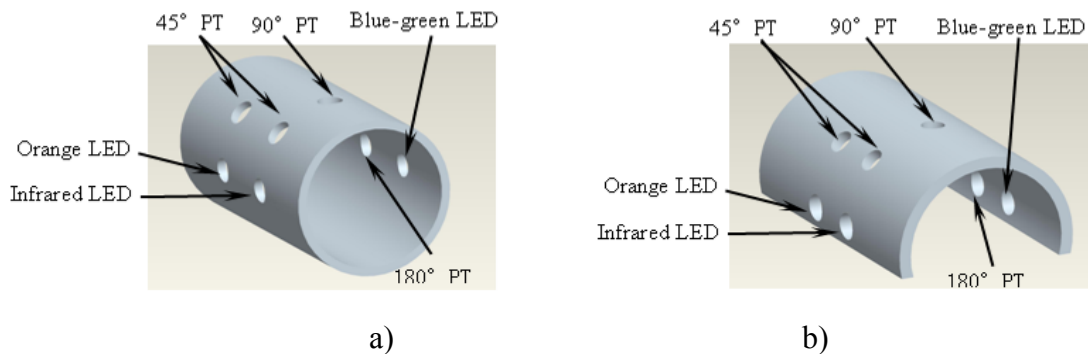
Optical SSC sensor design used in field experiments. PT stands for phototransistor. a) 3-D view of the closed-bottom design; b) 3-D view of the open-bottom design.
